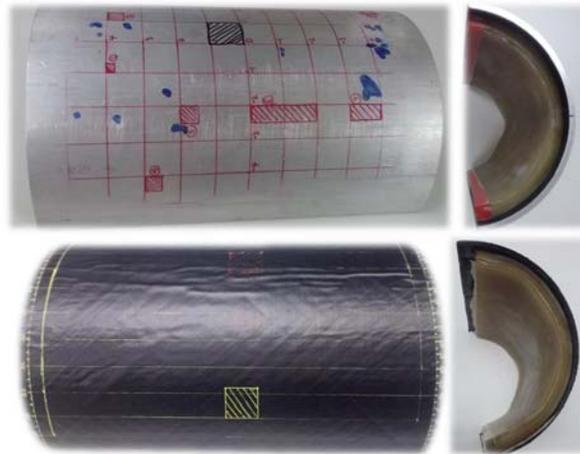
Ultrasonic guided wave measurements were performed on multilayered half-tube test specimens having an outer casing layer of aluminum and carbon fiber composite.
